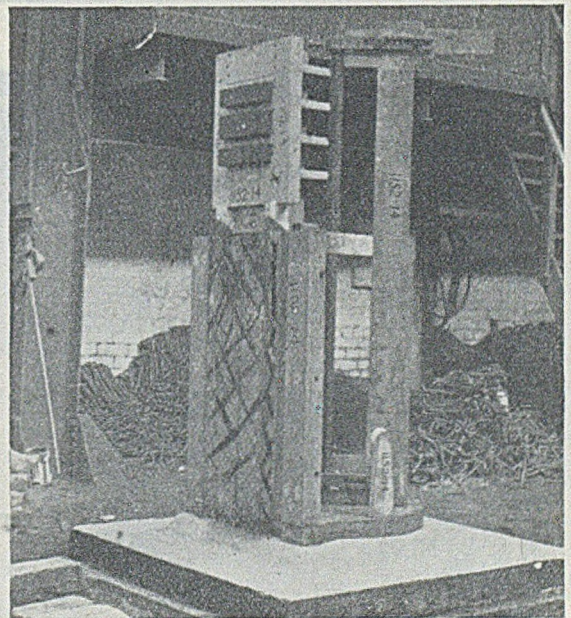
Part Pattern and Loam Board for a Large Cylinder Casting for Steam or Compressed Air.
